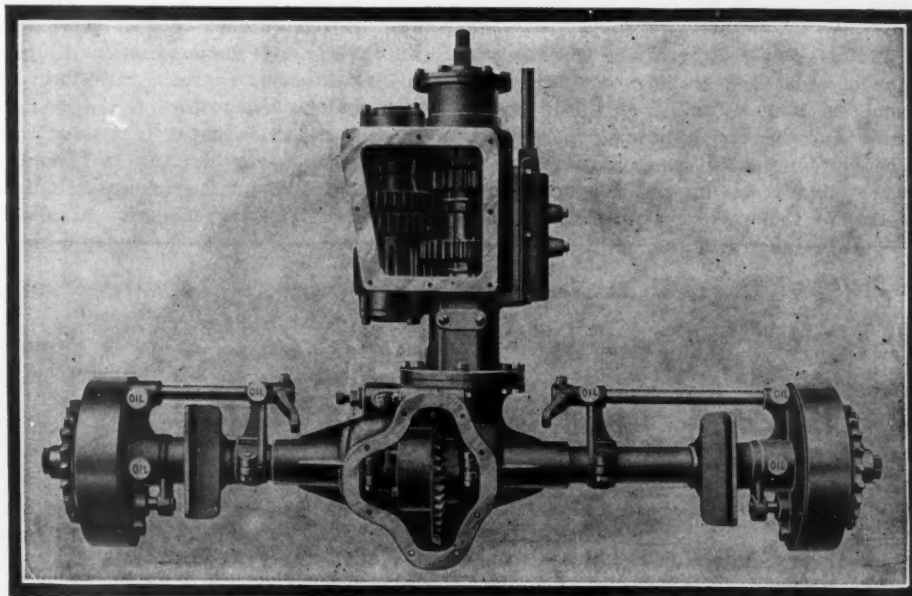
NEW COMBINED GEARSET AND JACKSHAFT OF MUNCIE GEAR WORKS
